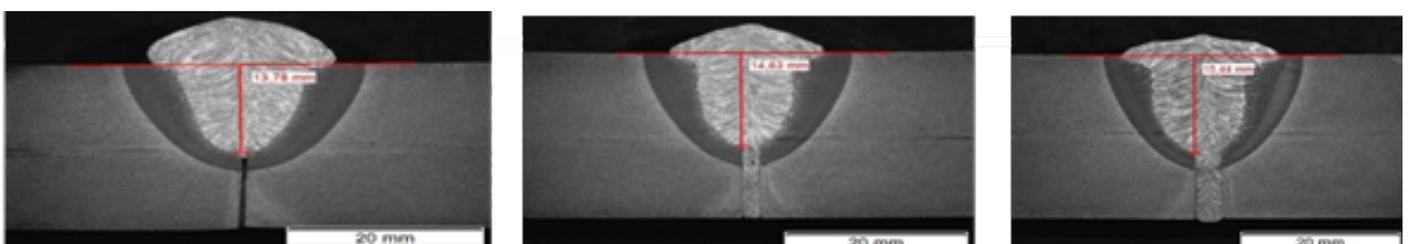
Macrographic metallographic specimens of the cross-section of elements welded using high-current arc in relation to various sizes of the gap between the elements (square butt weld preparation)
